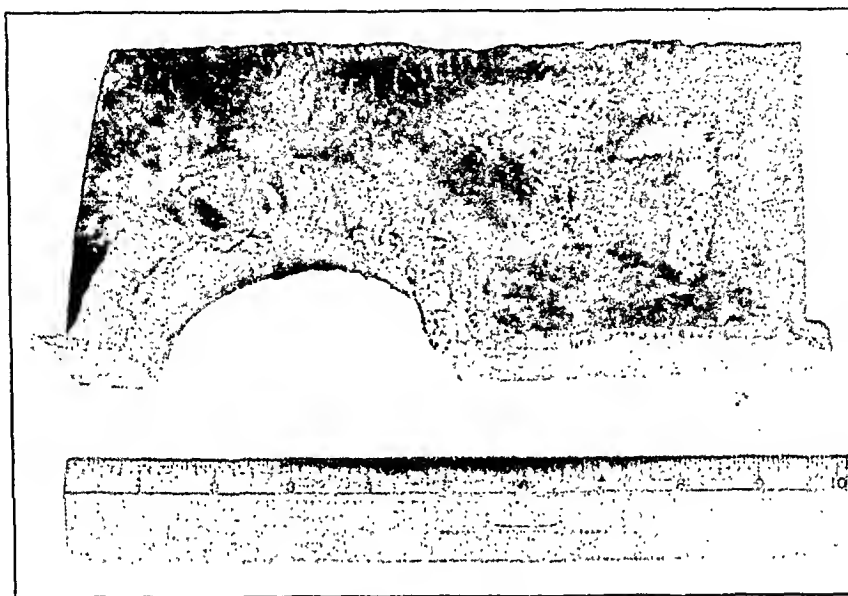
Steel casting 1 in. thick, with cracks. See Figures 21 and 22 for radiographs.
